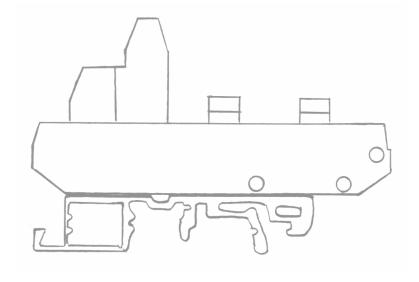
Digital Servo Axis Terminal Board Assembly Side View
